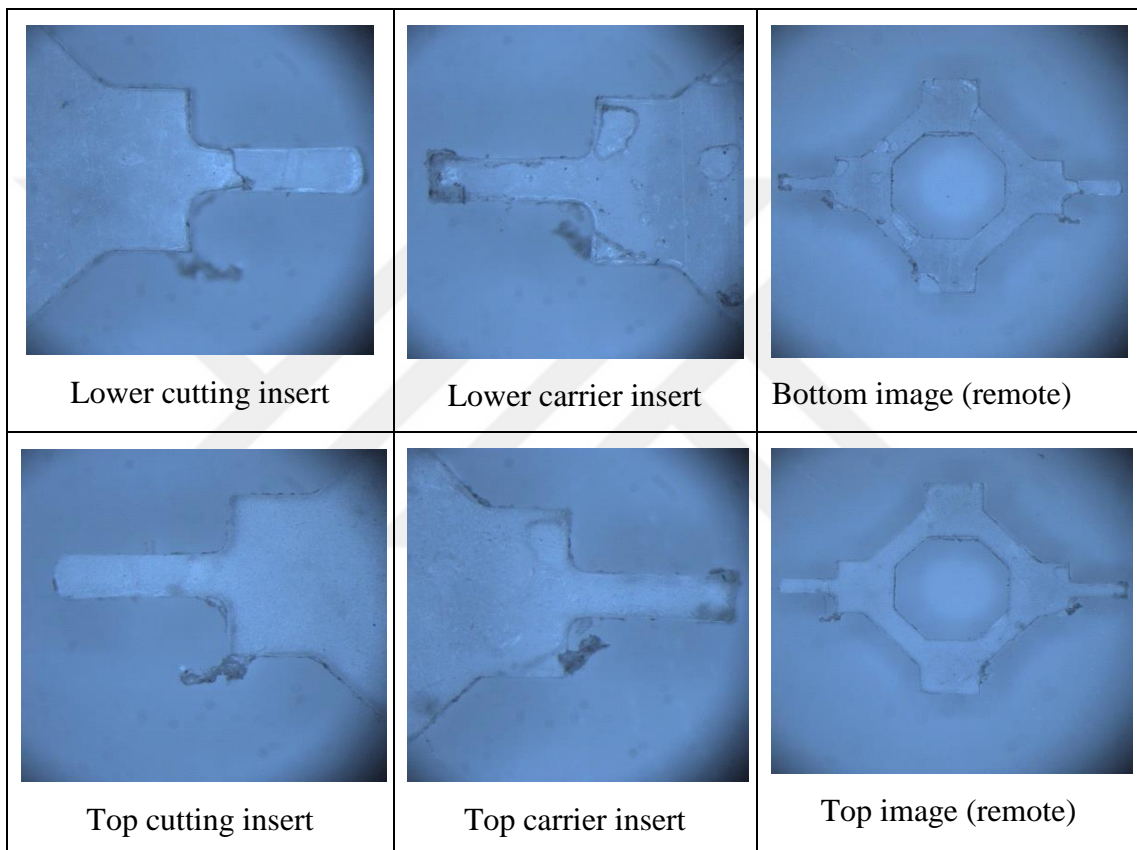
Detailed images taken after turning the micro-robot arm by processing the polymer material fixed with metal layer adhesive in order to balance during CNC machining
